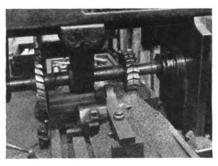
This machine picture taken at the Monarch Machine Tool Company demonstrates the high detail-revealing quality of mercury light. Even the tiny metal pieces shown are readily seen under this shadow-free light.
